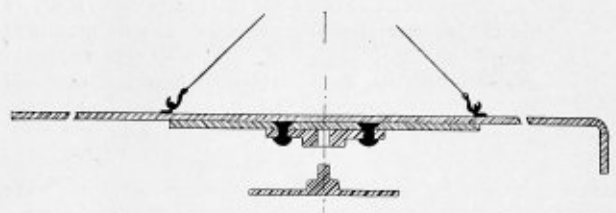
CENTERING BLOCK FASTENED TO TUBE PLATE OF A MARINE BOILER.
